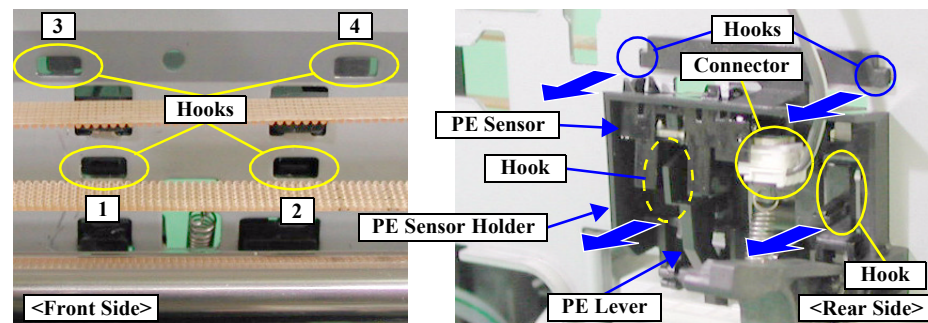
PE Sensor/PE Sensor Holder/PE Lever Removal 1
